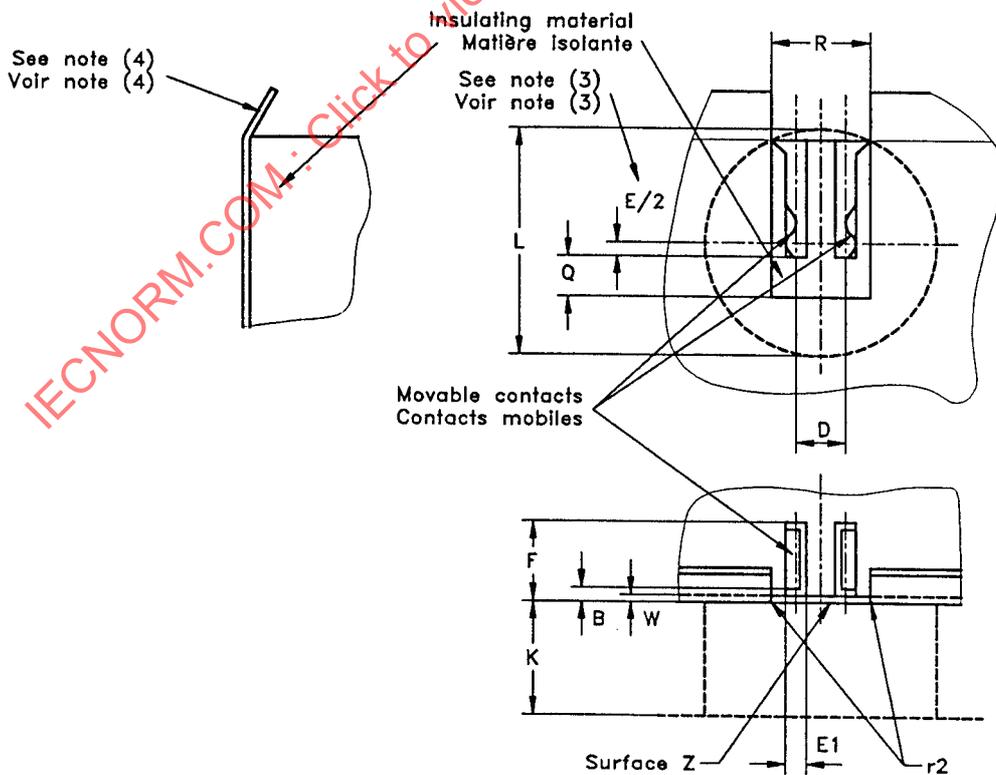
CONTACT ASSEMBLY WITH PARALLEL SLIDE-IN GROOVES
